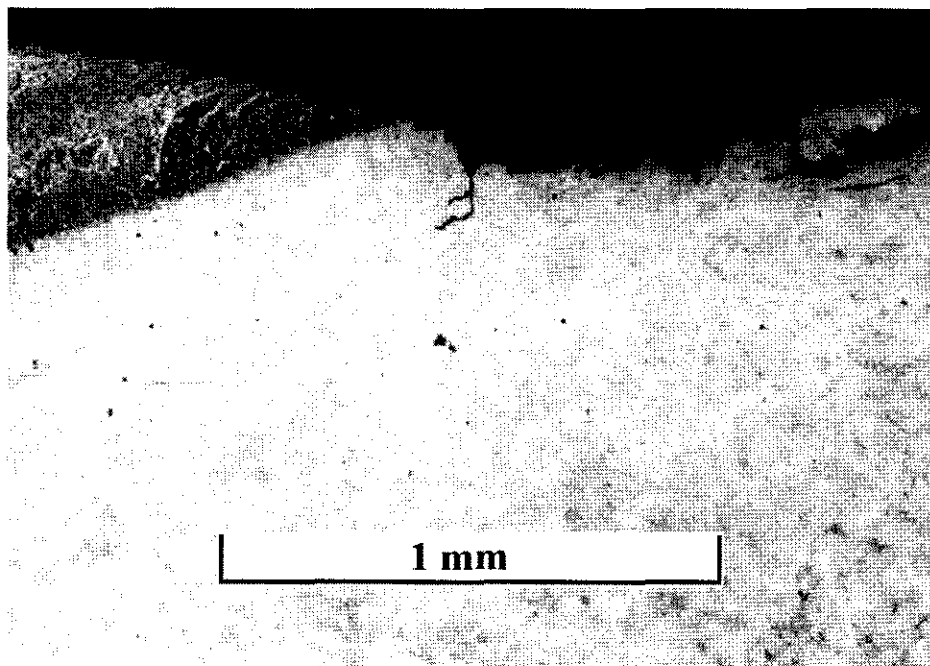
Crack propagating in the HAZ of the casting.
